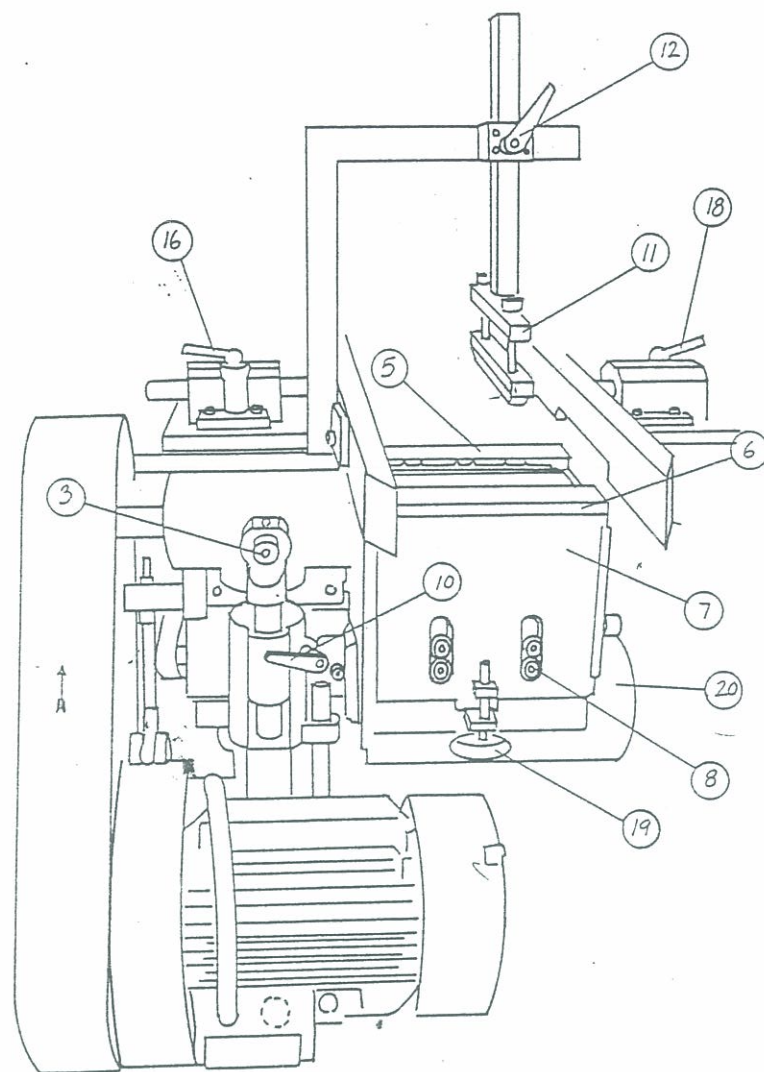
MF SIDEHEAD, FENCE & HOLD DOWN ASSEMBLY
